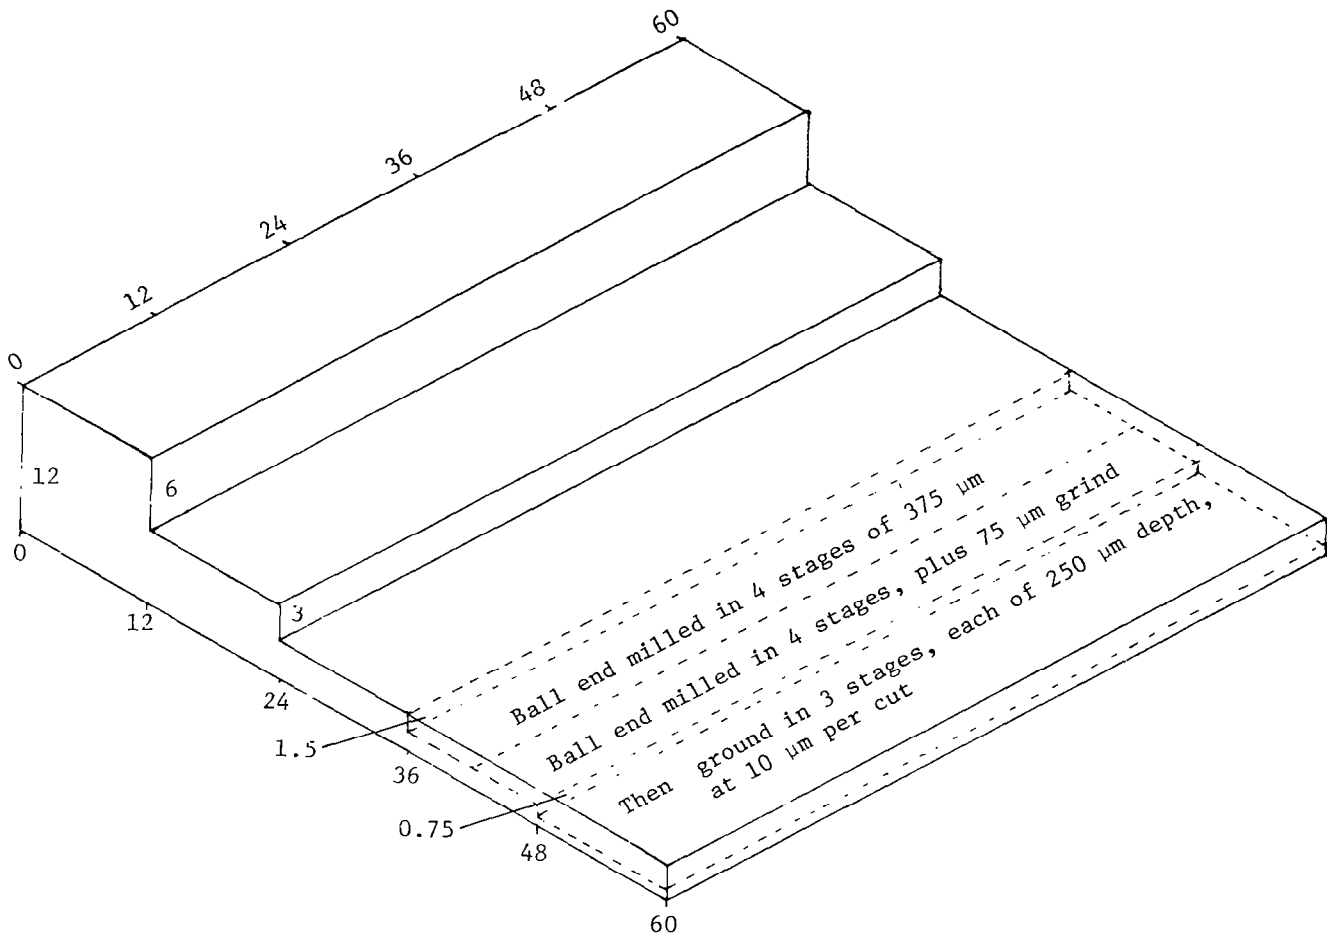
Recommended configuration of proposed standard specimen for warpage experiments. (Dimensions in millimeters.)
